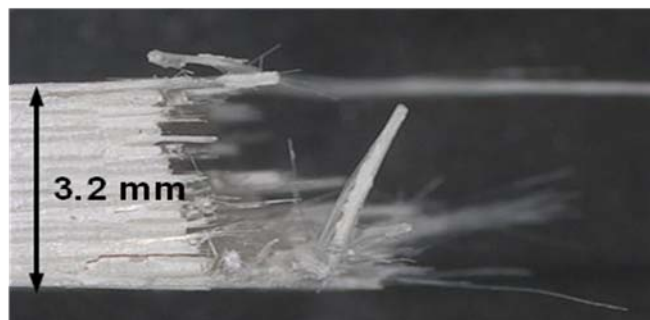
Fracture surface of the N720/AM specimen tested in creep at 131 MPa in steam at 1100°C (side view).
